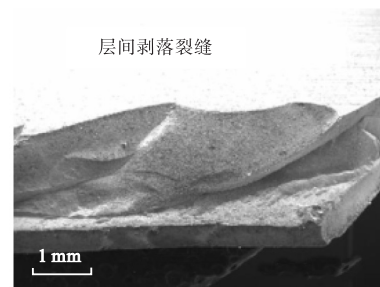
Results of cutting PCBN-WC samples with CO₂-LWJ focusing and defocusing beams
